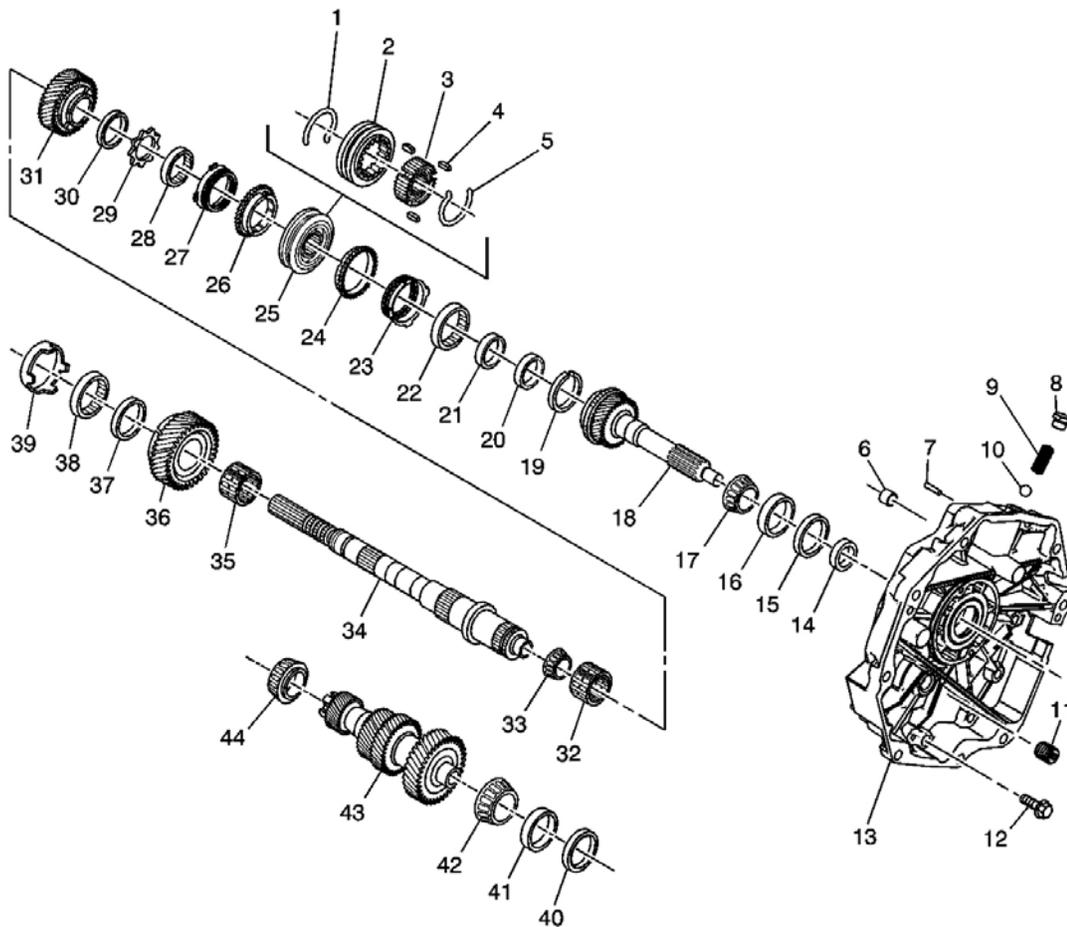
Adapter Plate and Gears Component Location (CTSV)
